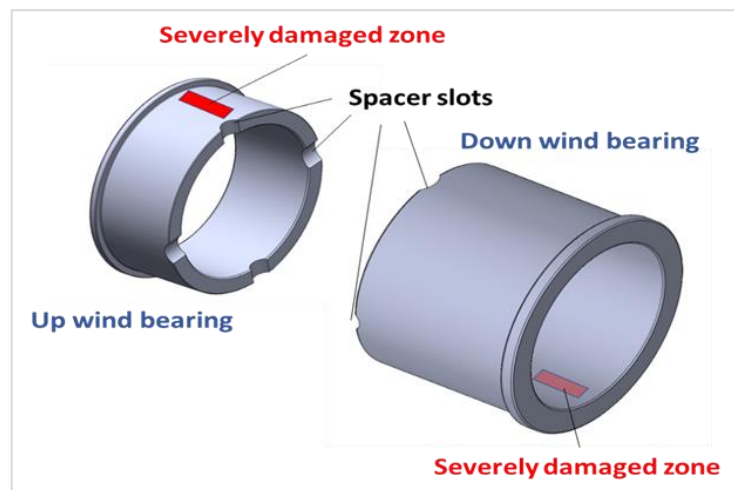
Spalling damage locations due to misalignment.
